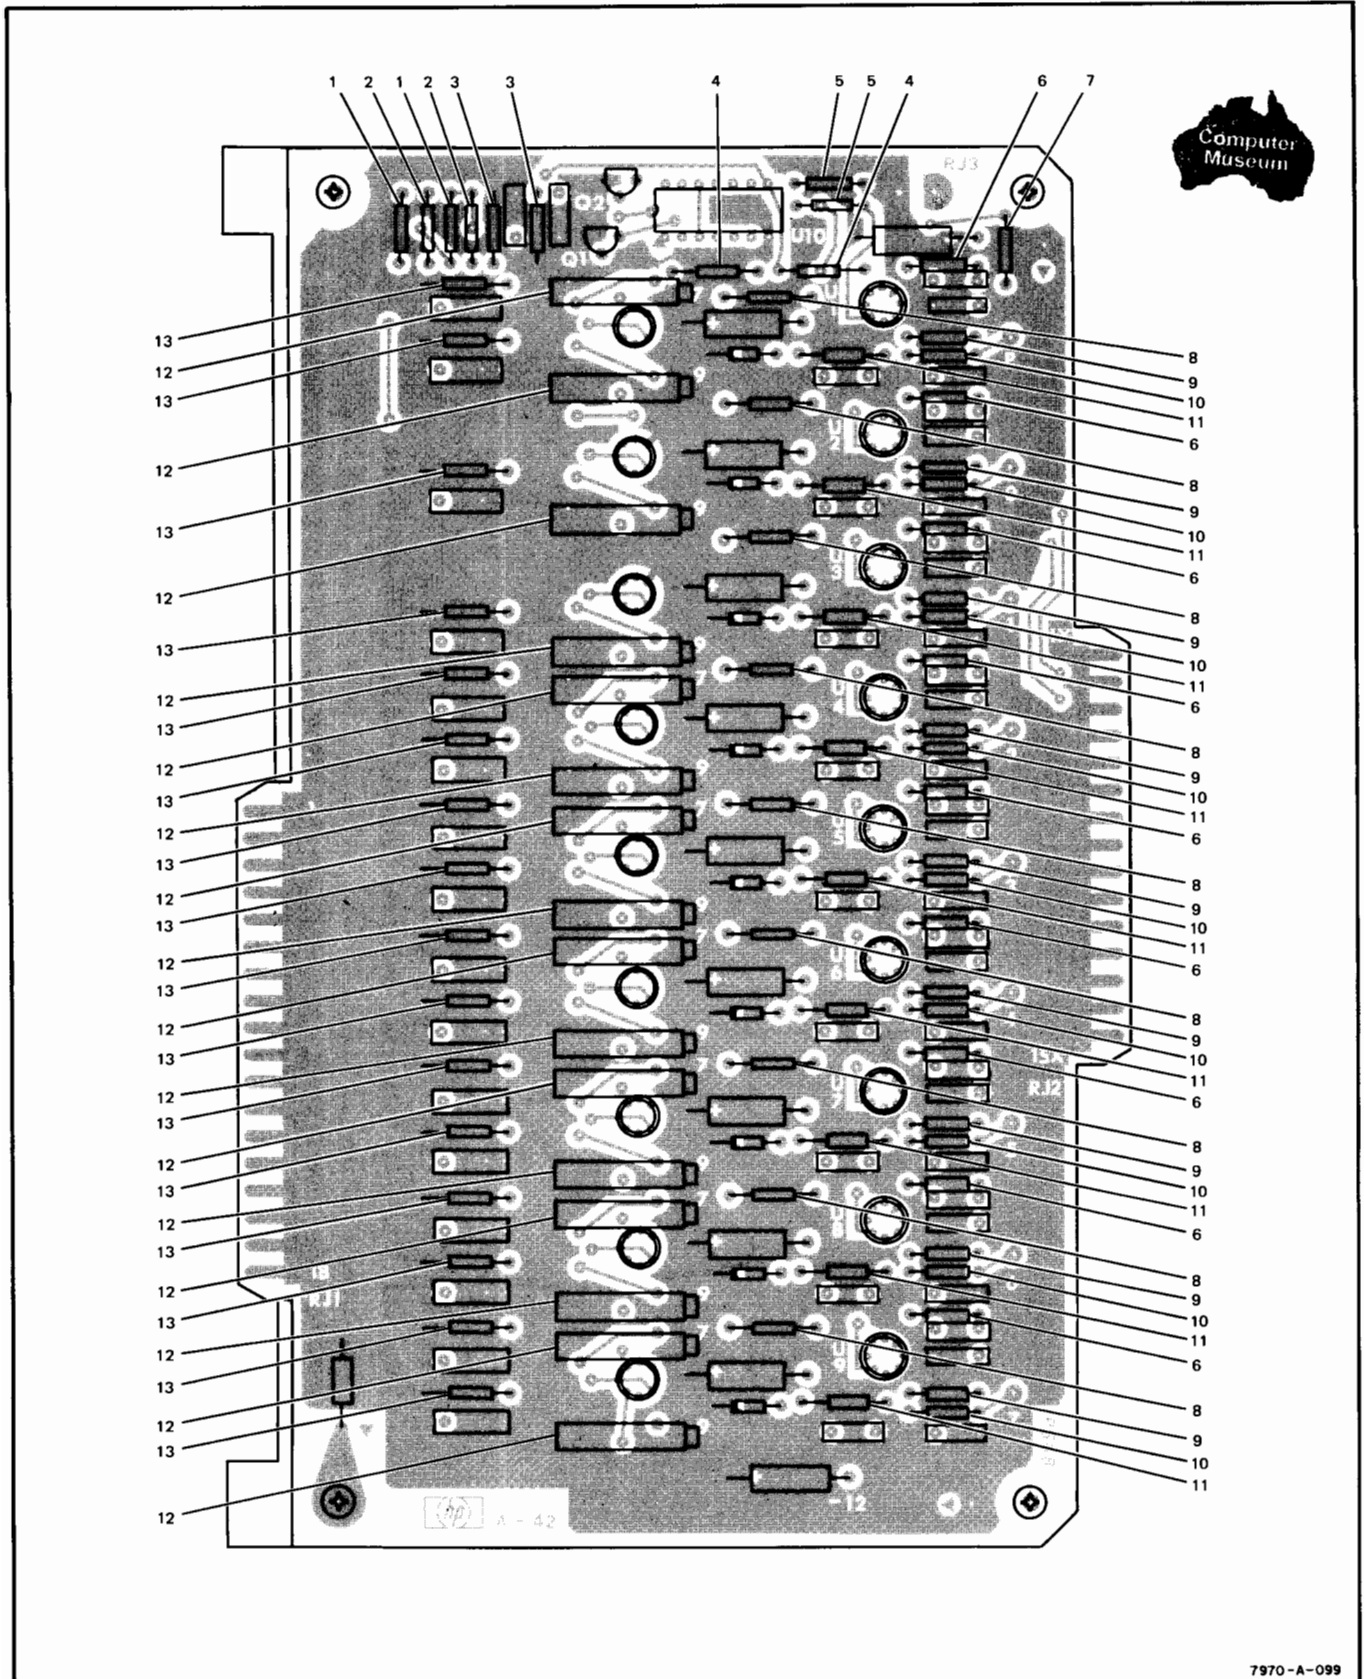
Read/Read Preamplifier PC Assembly A15 (Sheet 1 of 2)
